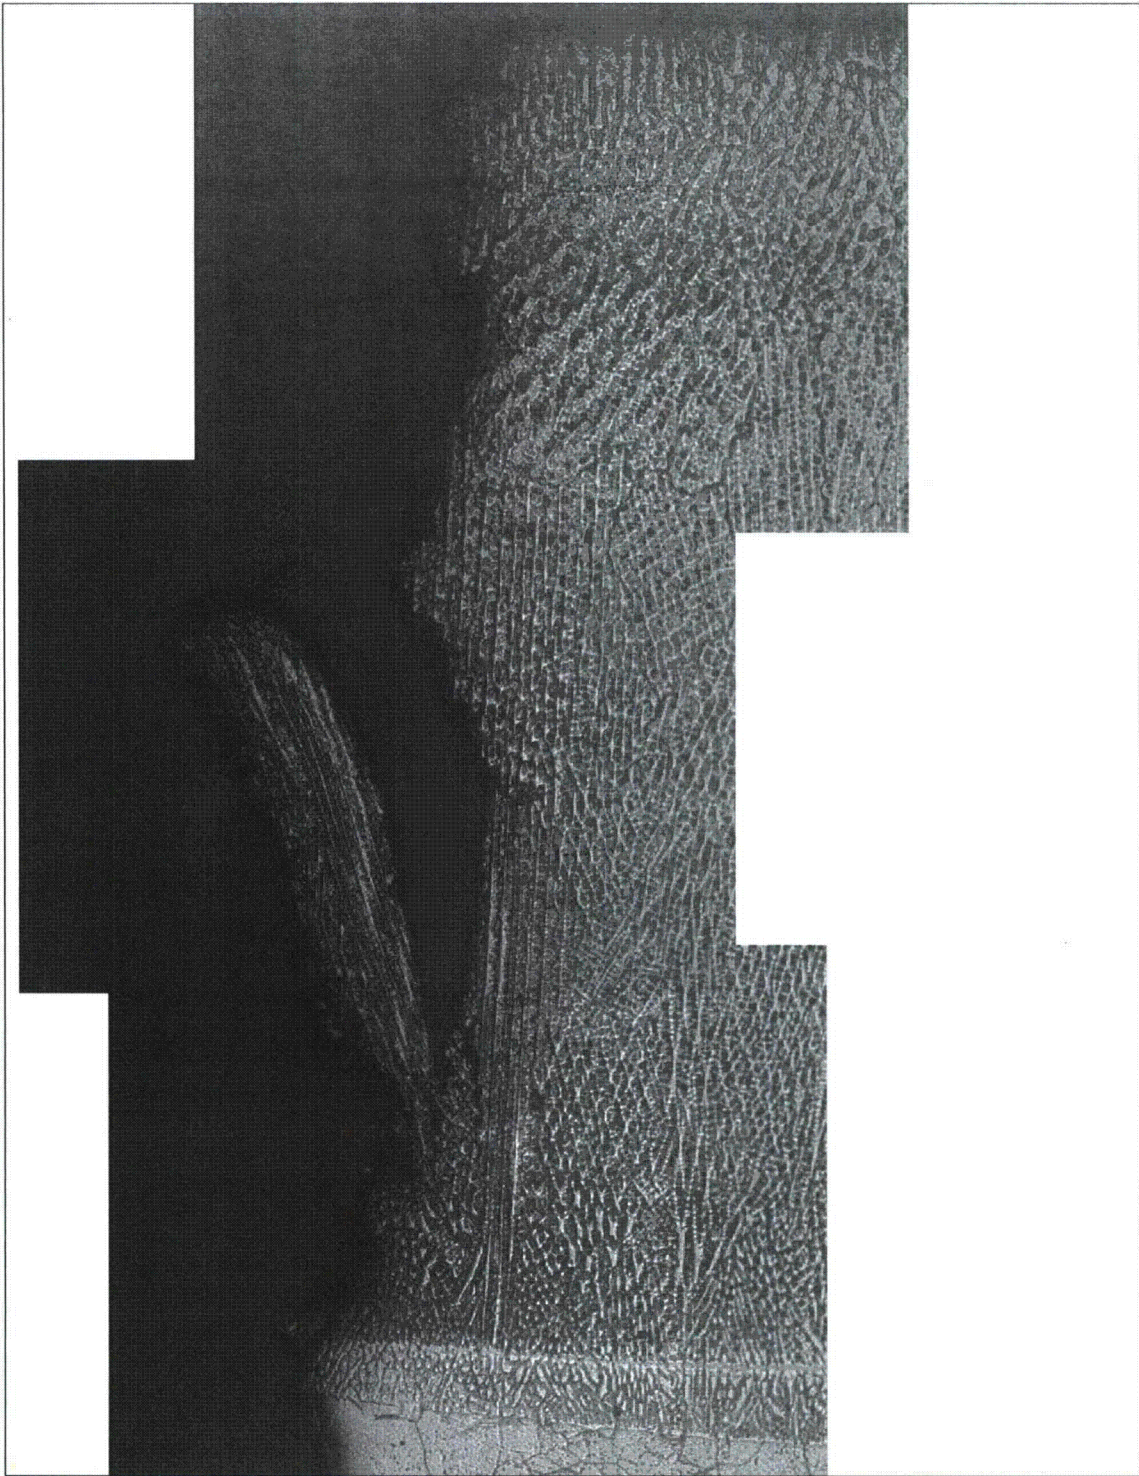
A montage showing the edge of the axial crack in the Sample A2A weld. There was limited crack branching within the weld. The angled flap was likely pulled open when the crack surface was exposed in the lab. (190x Magnification)
